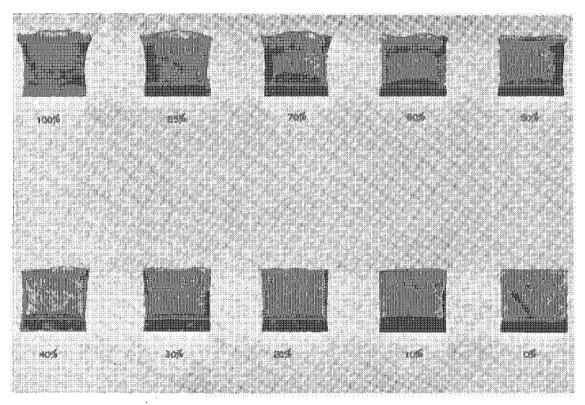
Fracture Appearance Charts and percent Shear Fracture Comparator.
